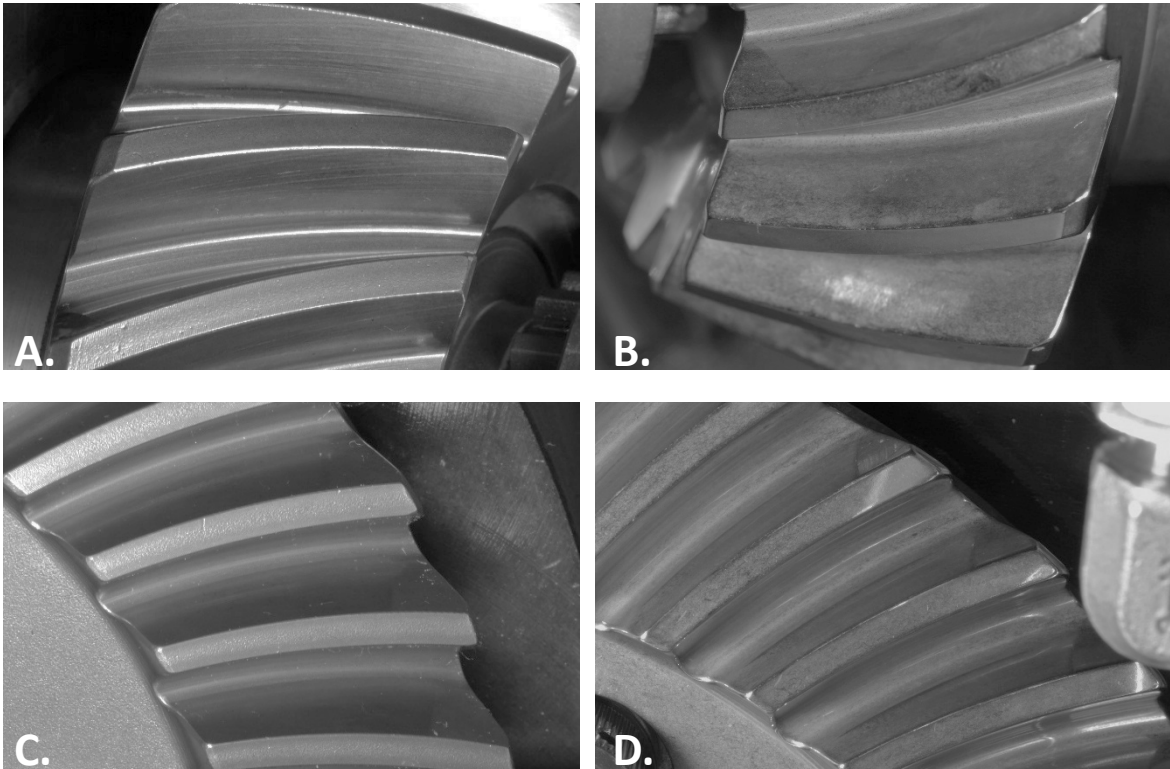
Baseline gear tooth photographs. (A) Left-hand pinion. (B) Right-hand pinion. (C) Left-hand gear. (D) Right-hand gear.
